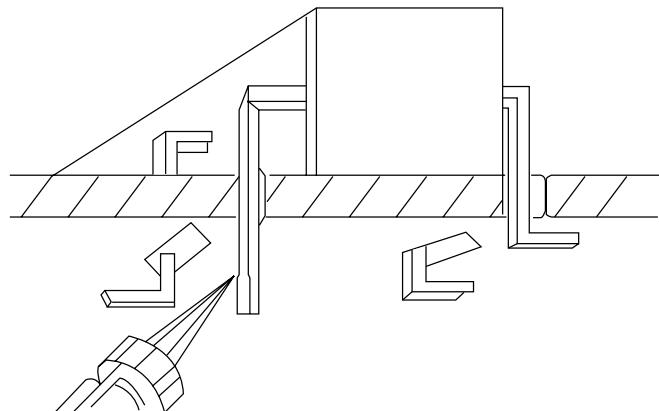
USE SOLDERING IRON TO PRY LEADS
